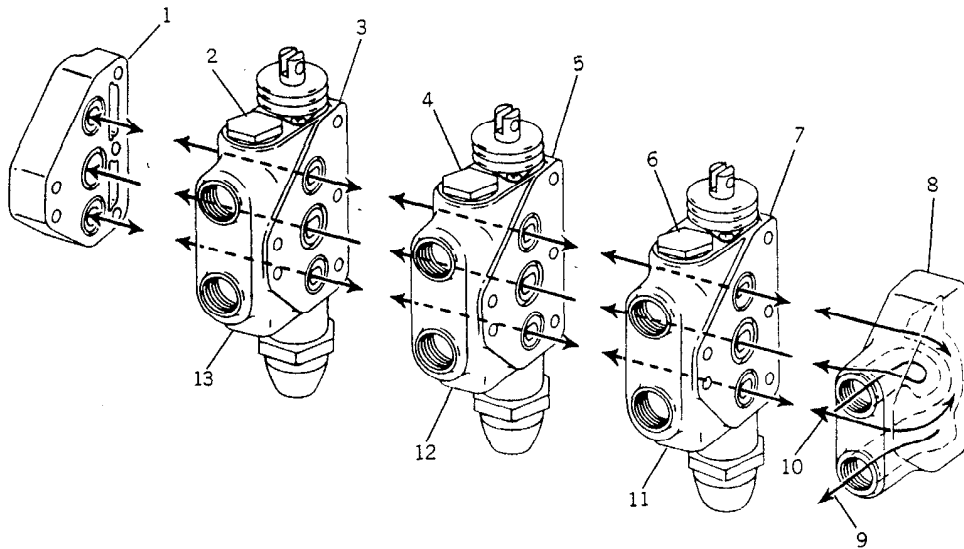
Extensible Dipperstick Cylinder Hydraulic Circuit
